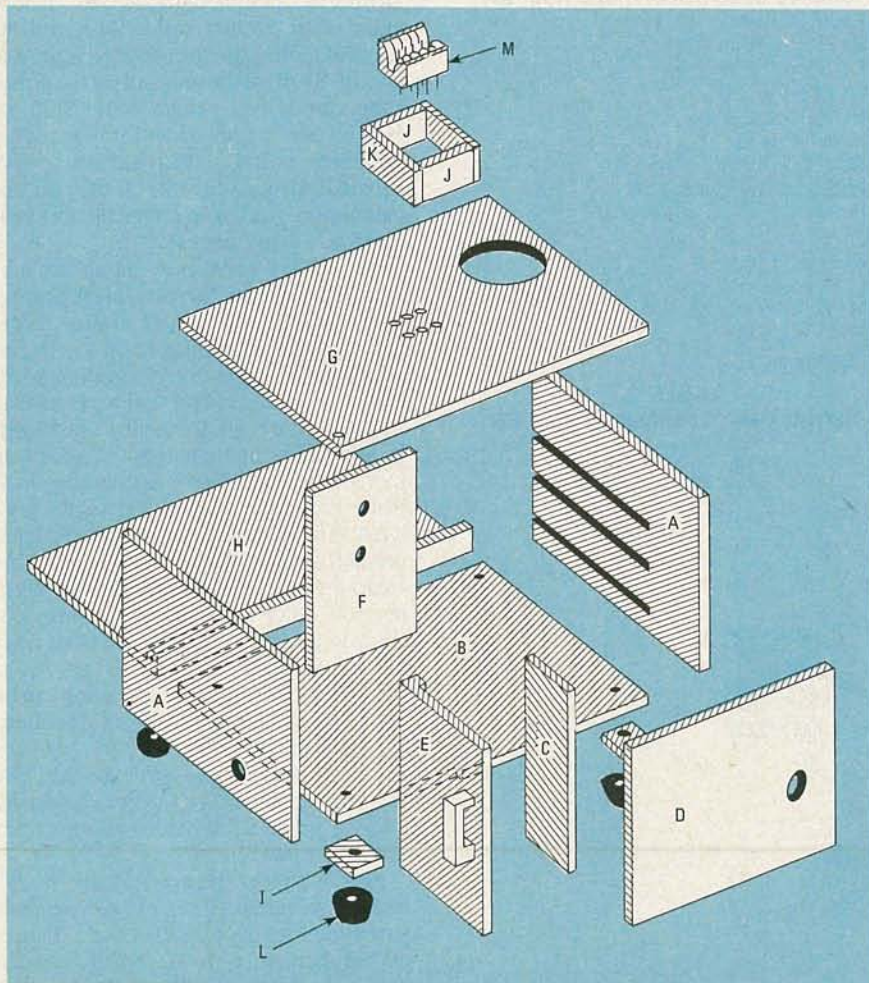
EXPLODED VIEW of the Heart-a-Matic's bottom case. The dimensions for that case are given in Table 1.
